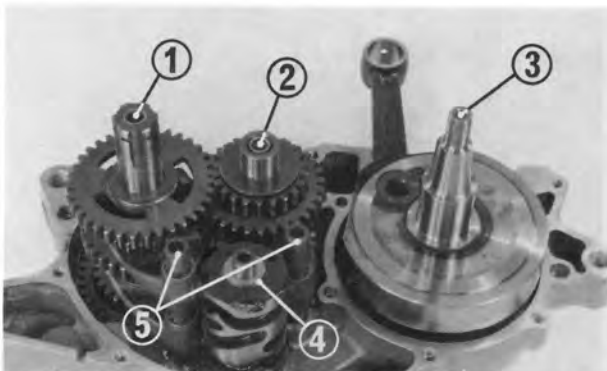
(1) Countershaft (2) Mainshaft (3) Crankshaft
